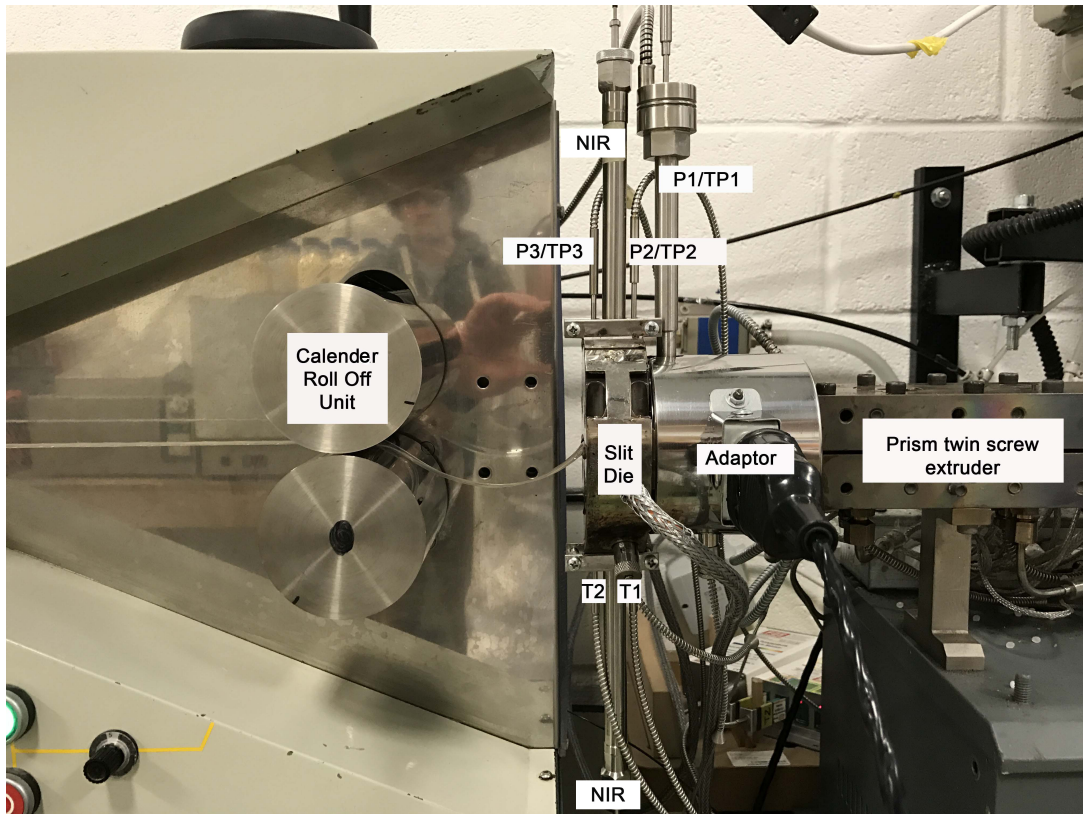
The extruder, adaptor, slit die and calender roll off unit.
